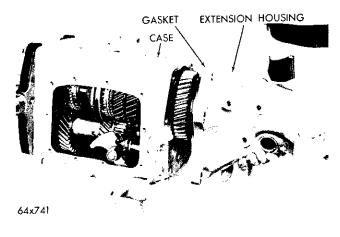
Removing or Installing Extension Housing and Mainshaft Assembly
